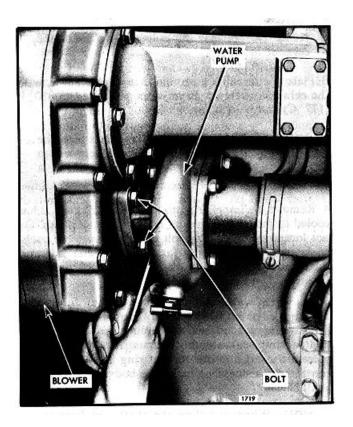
Loosening Inner Pump-to-Blower Attaching Bolt with Tool J 4242
